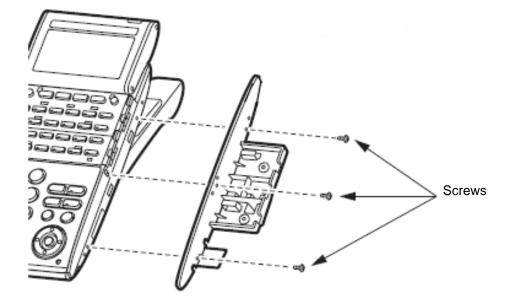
Secure Bracket to Multiline Terminal with Screws
